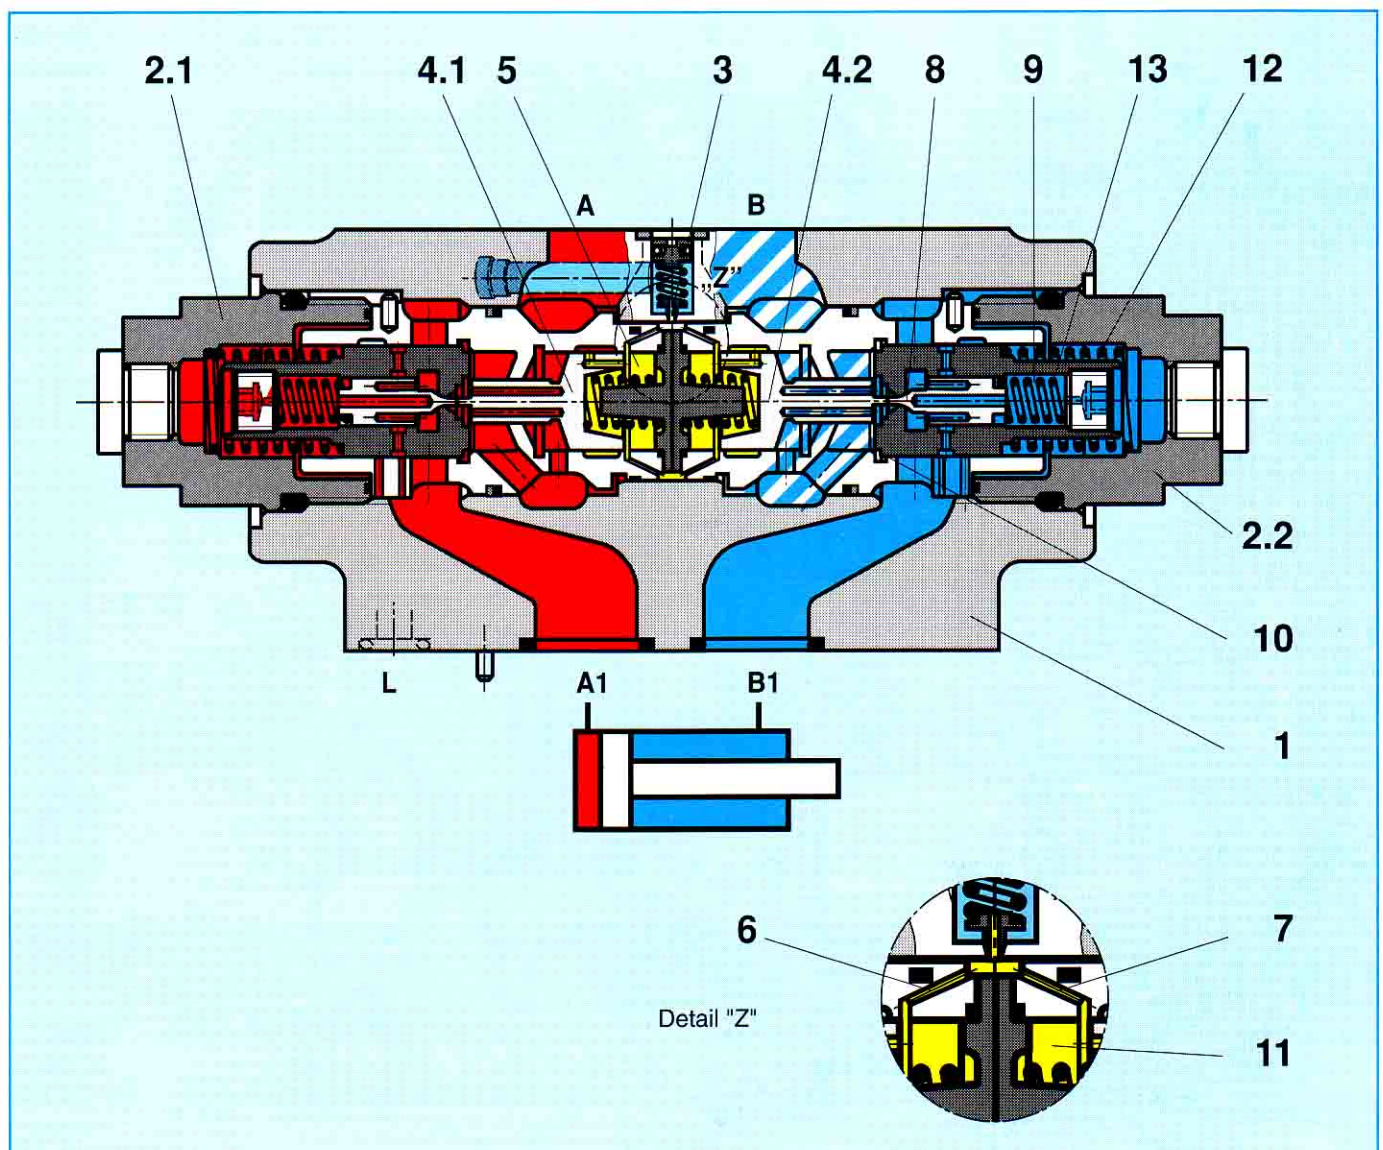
Sectional view of meter-out throttle isolating pressure compensator of poppet design
